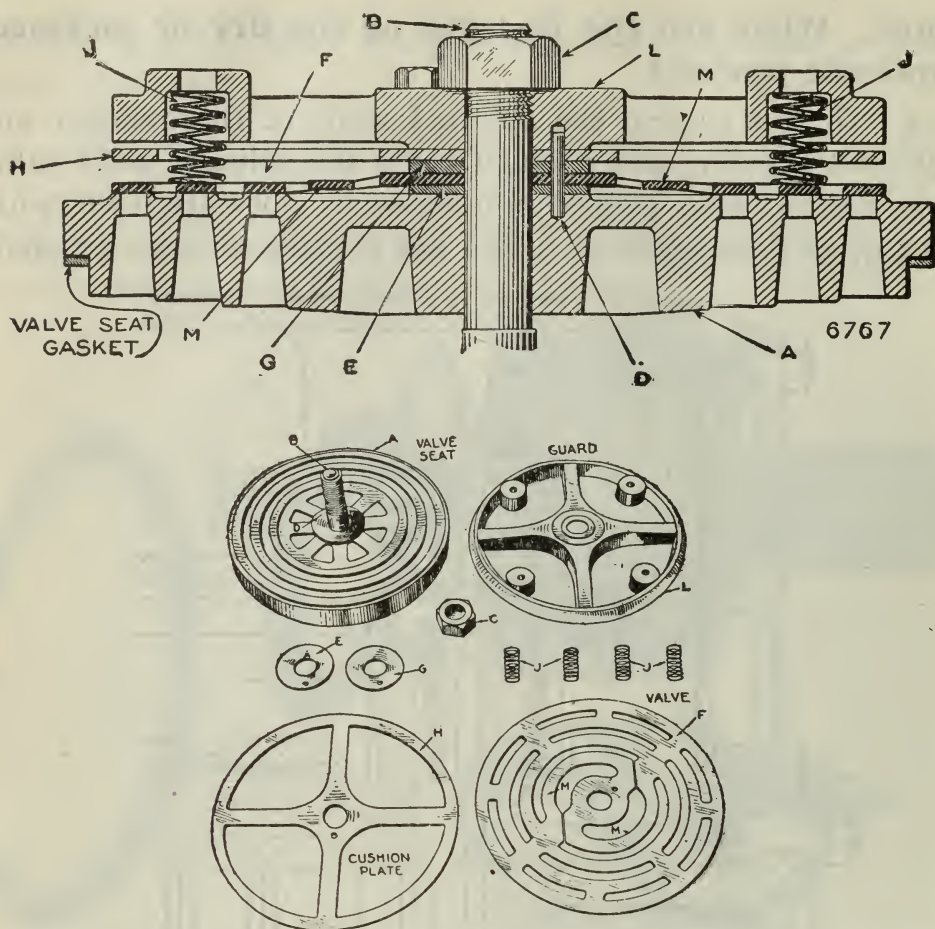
,363.—Sectional view showing method of placing Ingersoll-Rogler inlet and discharge valves in the cylinder of duplex compressors.
